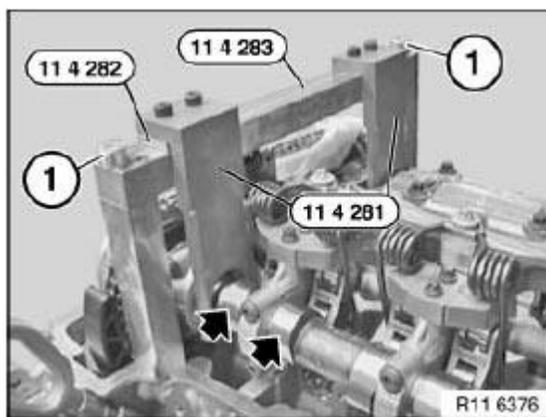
Identifying Special Tools Fitted To Camshaft And Cylinder Head
